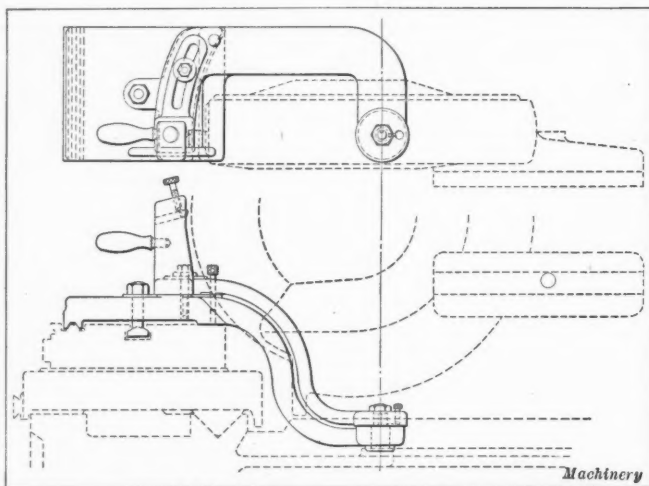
Wheel Truing Device used in connection with Rifle Barrel Grinding Attachment
